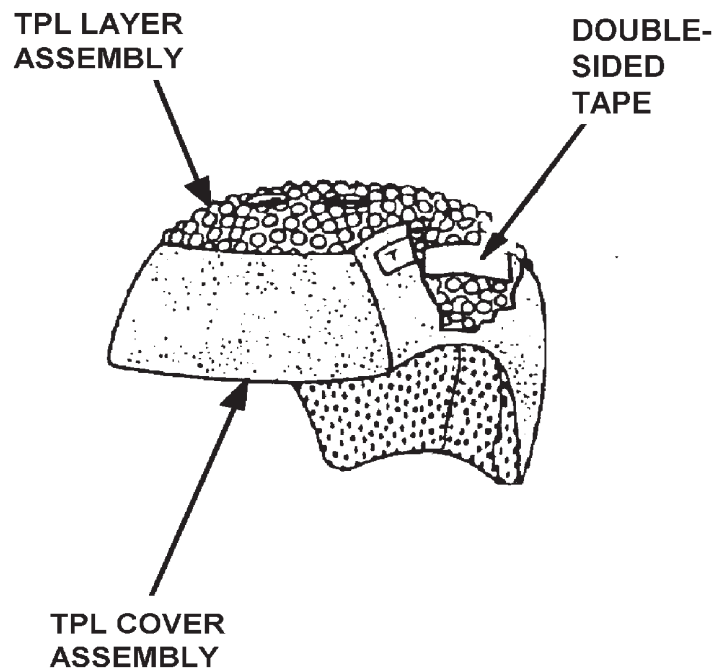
TPL Cover Assembly Secured to TPL Layer Assembly
